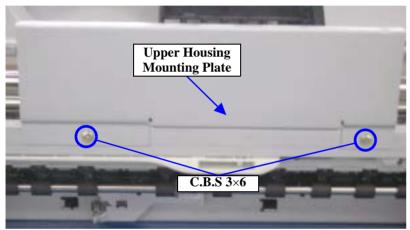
Screws That Secure the Upper Housing Mounting Plate
